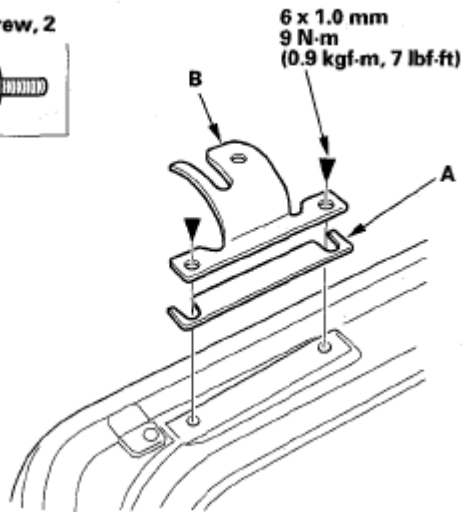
Identifying Glass Bracket Screws And Shim With Torque Specification
